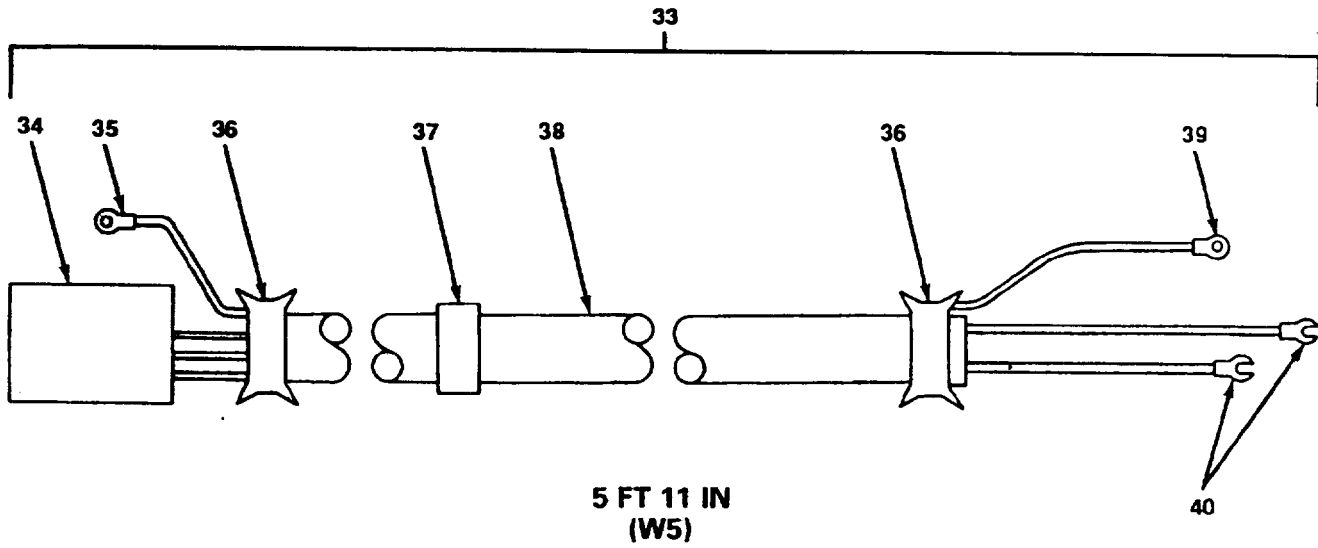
Cable Assemblies W1 through W6 (Sheet 3 of 3).
